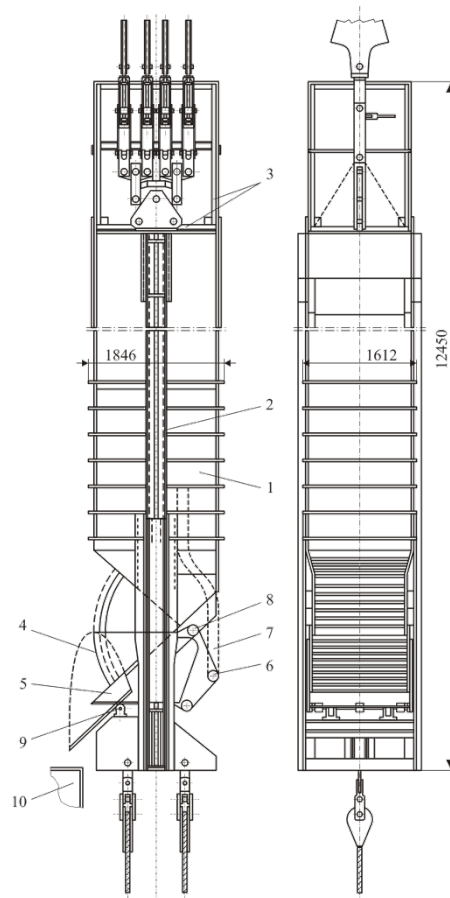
Bottom Discharge Skip: 1 - box, 2 - frame, 3 - platform with railing for control, 4 - sector closure, 5 - bottom chute, 6 - roller, 7 - latch, 8 - joint, 9 - axle, 10 - silo.
